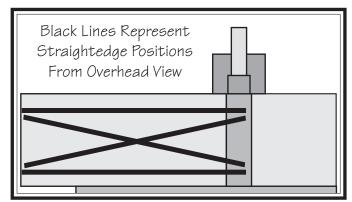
Straightedge positions for verifying if outfeed table is parallel with cutterhead.
